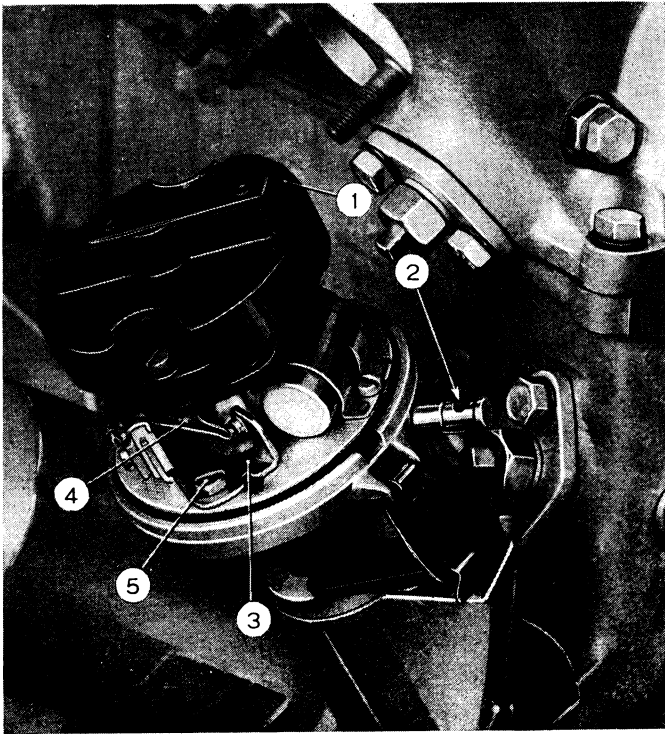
Ignition distributor, without cap, in place on engine 118 B.000.
